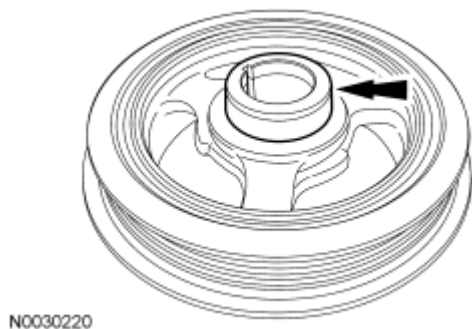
Lubricating Crankshaft Pulley Sealing Area With Clean Engine Oil
